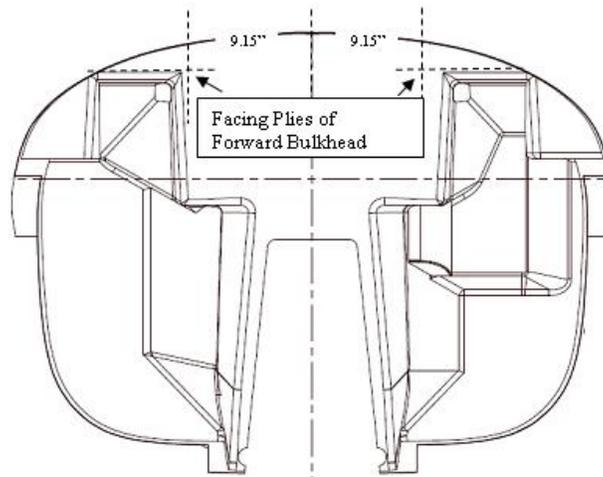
Location: Just Upward Of The Flange And At Butt-Line
